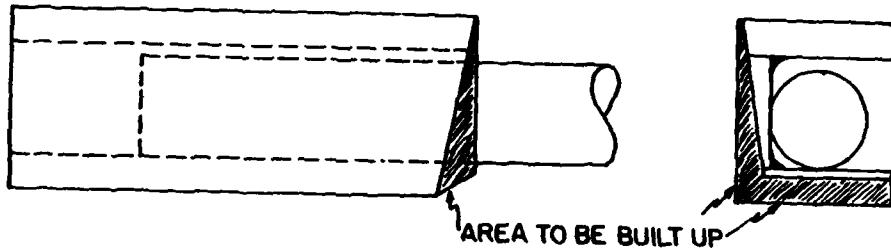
Welding sequence for U-groove repair technique.
